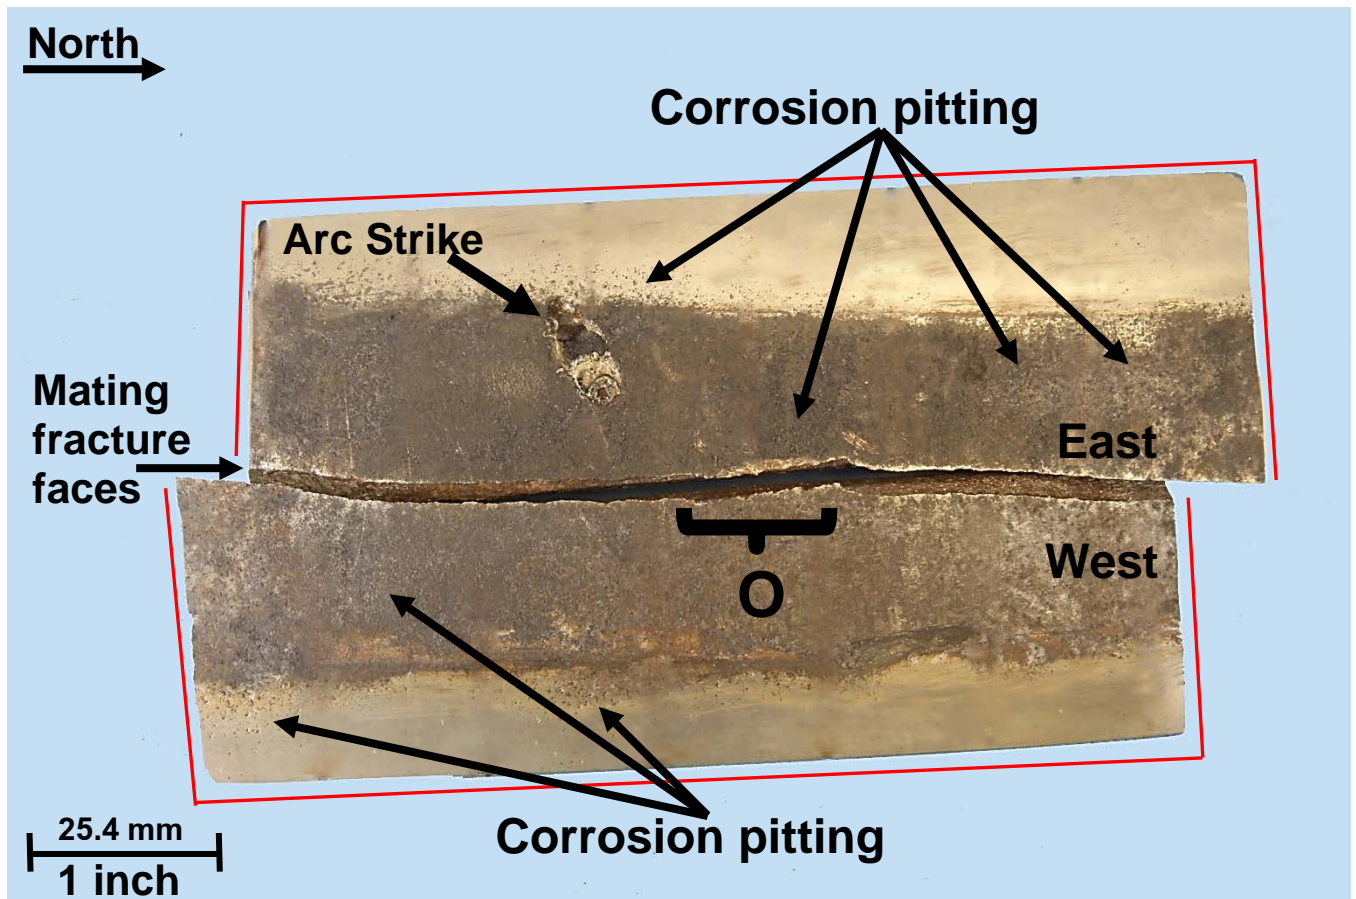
Photograph of the 6-inch long cut-out portion of the east fracture face and similar cut-out from the mating fracture face positioned next to each other as if intact showing the outer face of the pipe and the fracture origin area indicated by bracket "O". The cut-out portions outlined by red lines in this photograph correspond to the same areas indicated by red lines in figures 8 and 9. Corrosion pitting was noted in the general area of the fracture origin and surrounding areas on both sides of the fracture, such as in the areas indicated by arrows. The corrosion pitting areas are clearly visible in areas that were polished prior to hardness testing. An arc strike was located near the fracture.
